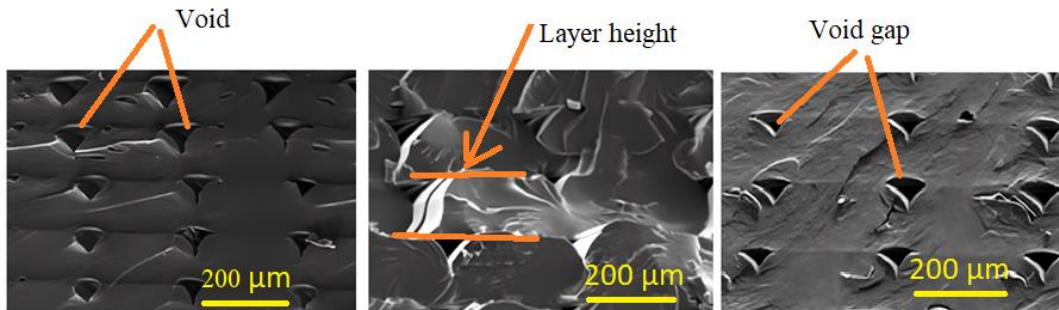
SEM analysis revealed that parts printed with larger nozzle sizes (0.8 mm) had more visible layer lines and larger voids.
